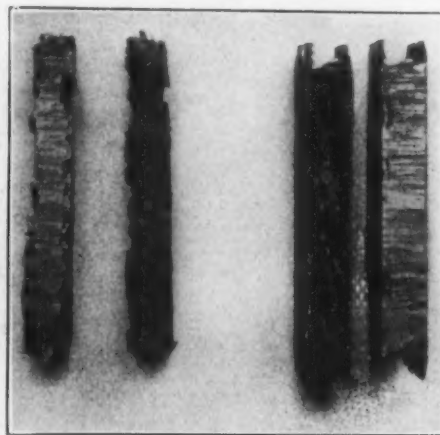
End View and Section of Pieces Shown in Fig. 1.
